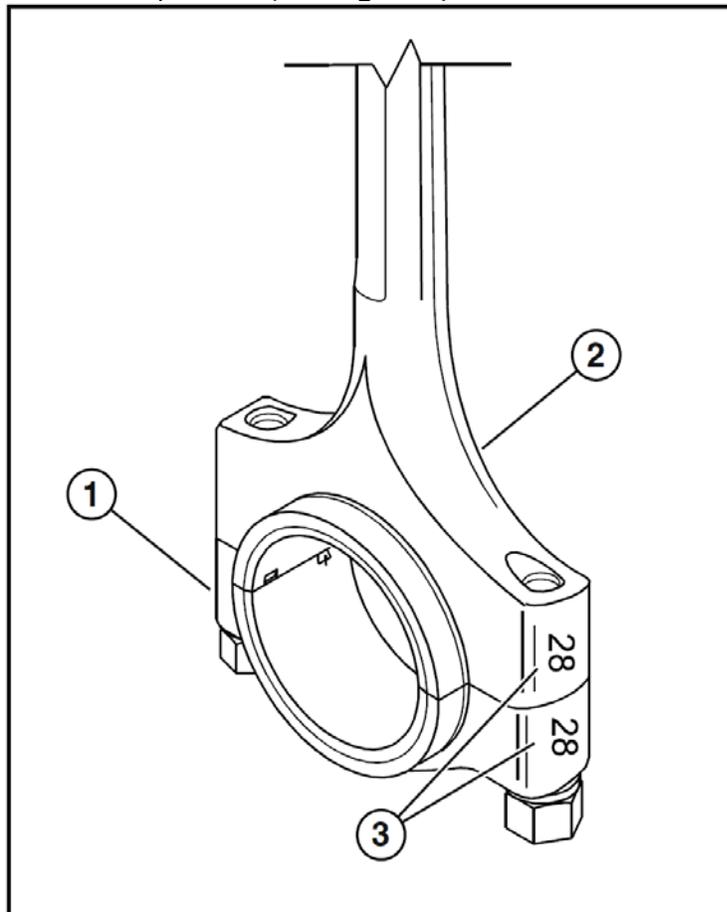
Connecting Rod and Bearing Cap Orientation Marks
